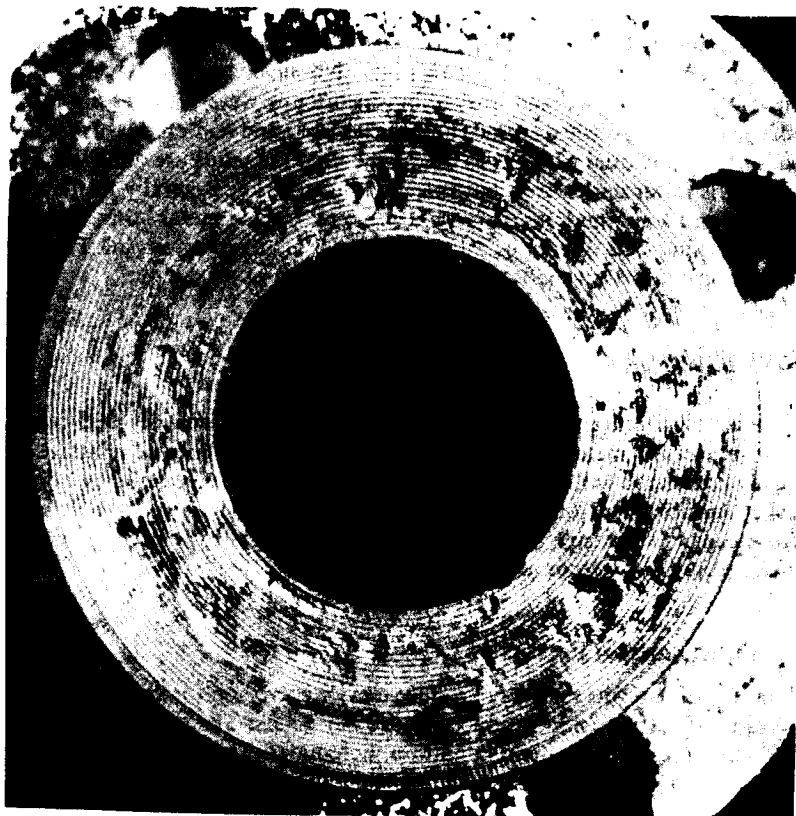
Gasket (crevice) corrosion on a large stainless steel pipe flange (E. V. Kunkel.)
